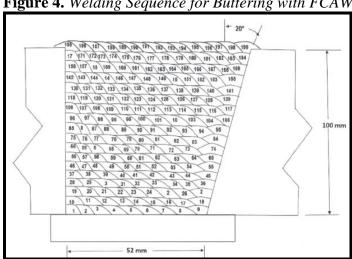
Welding Sequence for Buttering with FCAW
